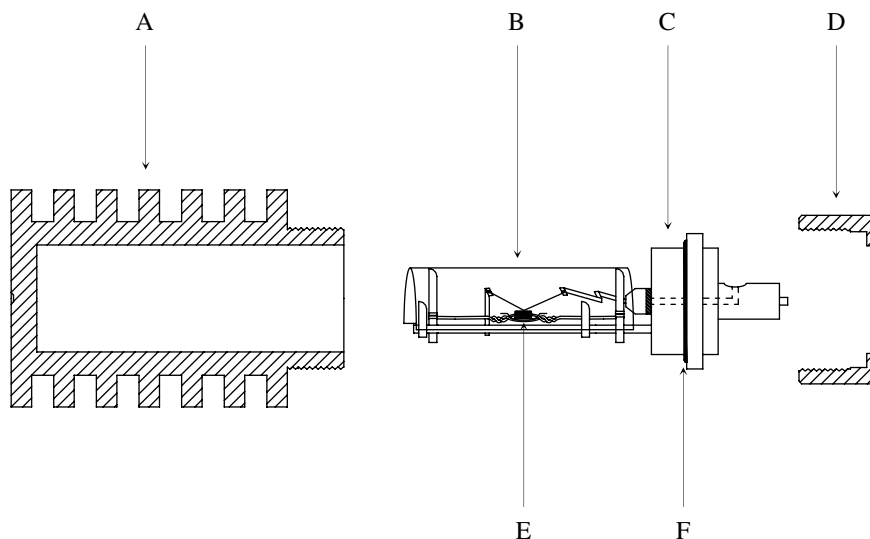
Details of the bomb assembling. A – bomb body; B – Platinum sheet; C – bomb head; D – retaining ring; E – crucible with pellet; F – Viton O-ring.
